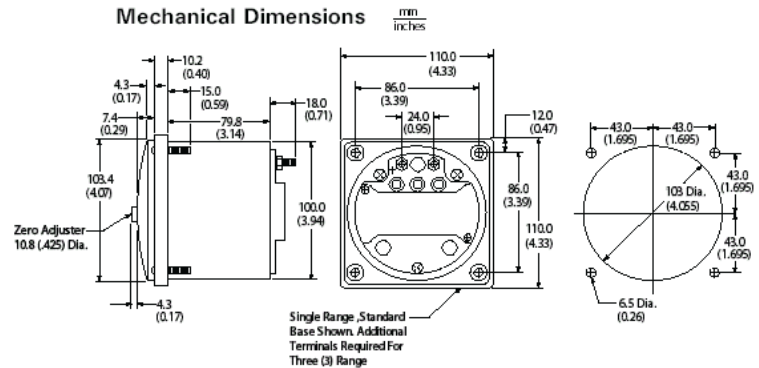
HLS-110 Panel drilling plan. For instrument dimensions.
